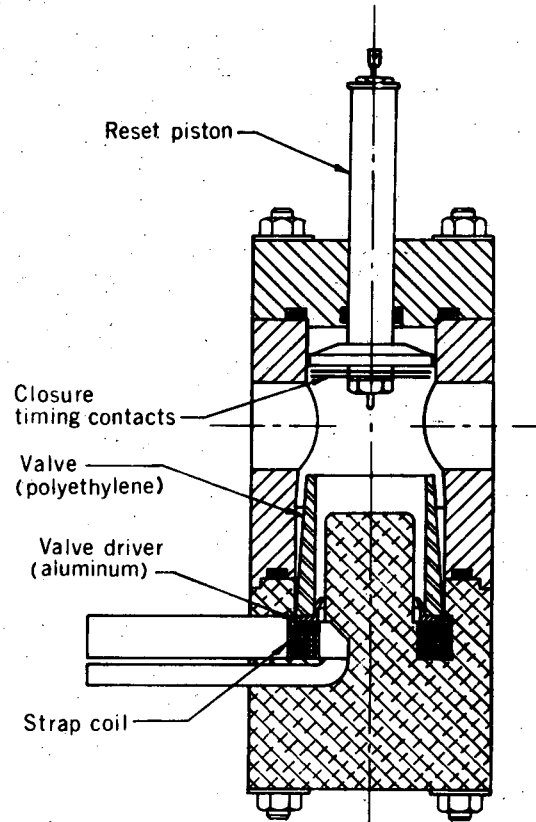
Fast-closing valve. One in. clear bore. Eleven-turn coil insulated from driver by 10 mils of epoxy.
